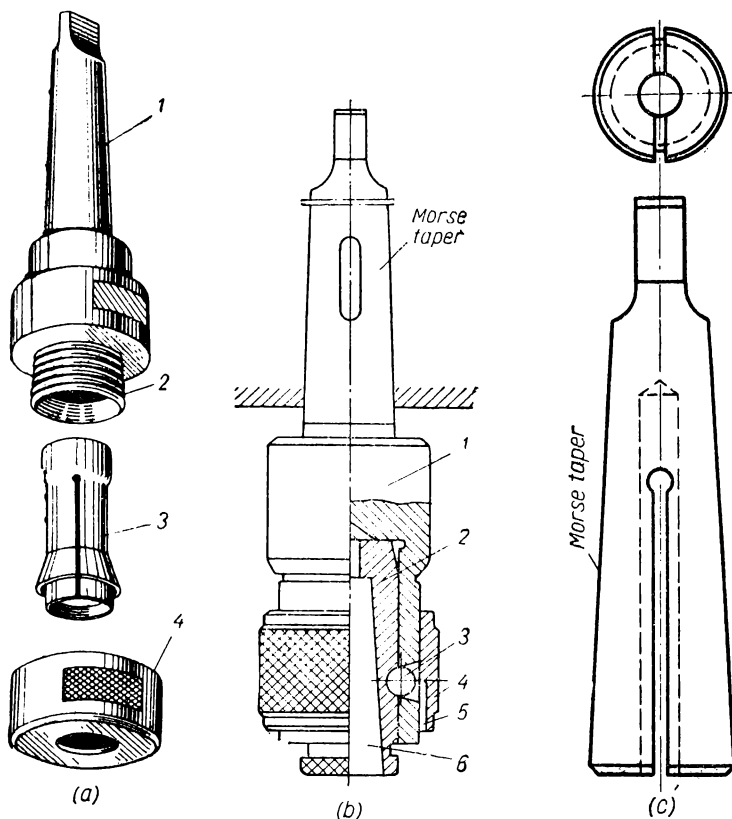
Collet-type drill chuck (a), quick-change drill chuck (b), split taper sleeve for straight-shank drills (c)
